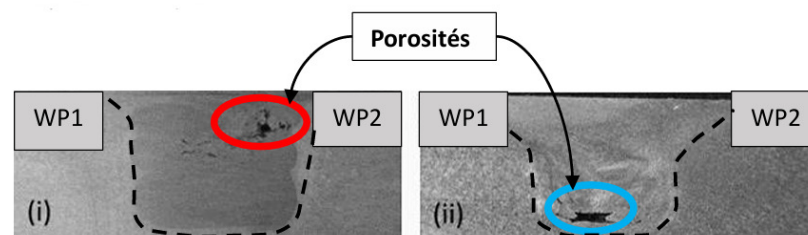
Porosity defects: (i) hot welds; (ii) cold welds, WP1 workpiece 1, and WP2 workpiece 2.
